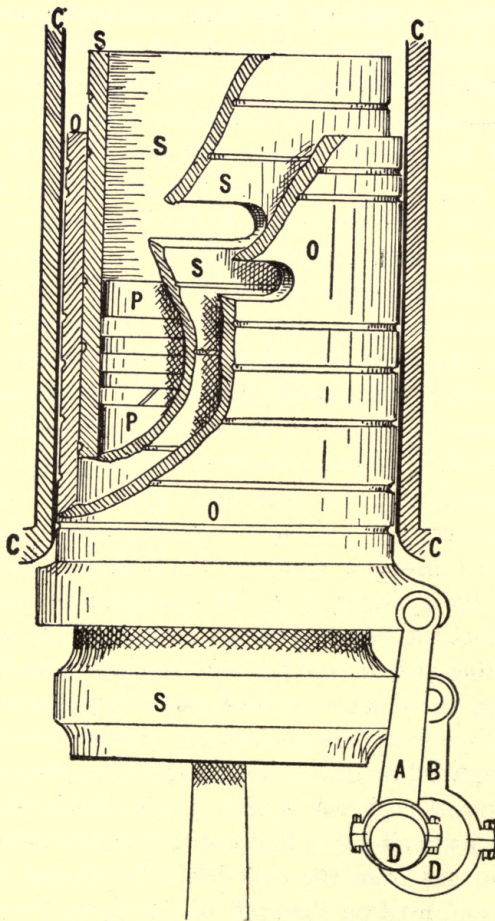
Knight Sleeve-valve Motor; Piston and Sleeves
